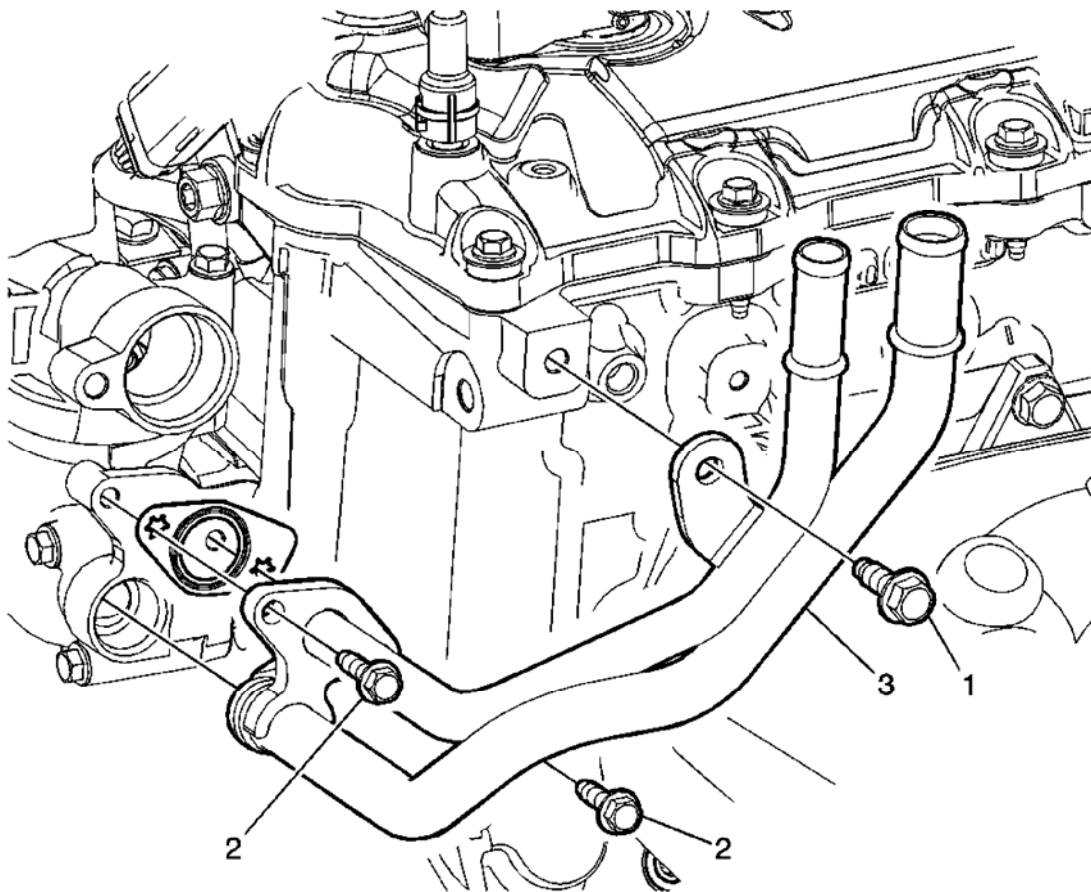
Heater Inlet & Outlet Pipe (LLT)
